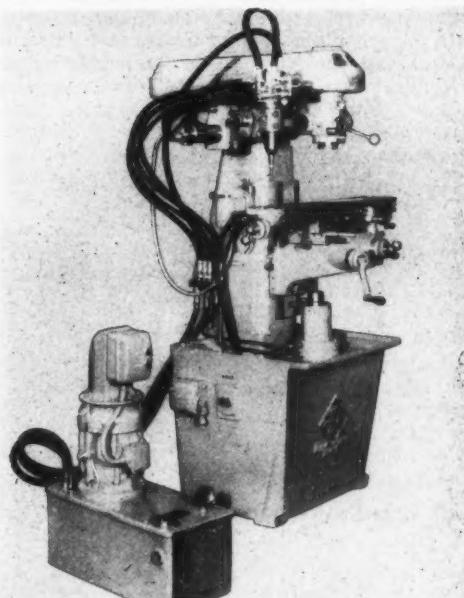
The Beaver type A vertical milling machine is here shown fitted with hydraulic copying equipment
